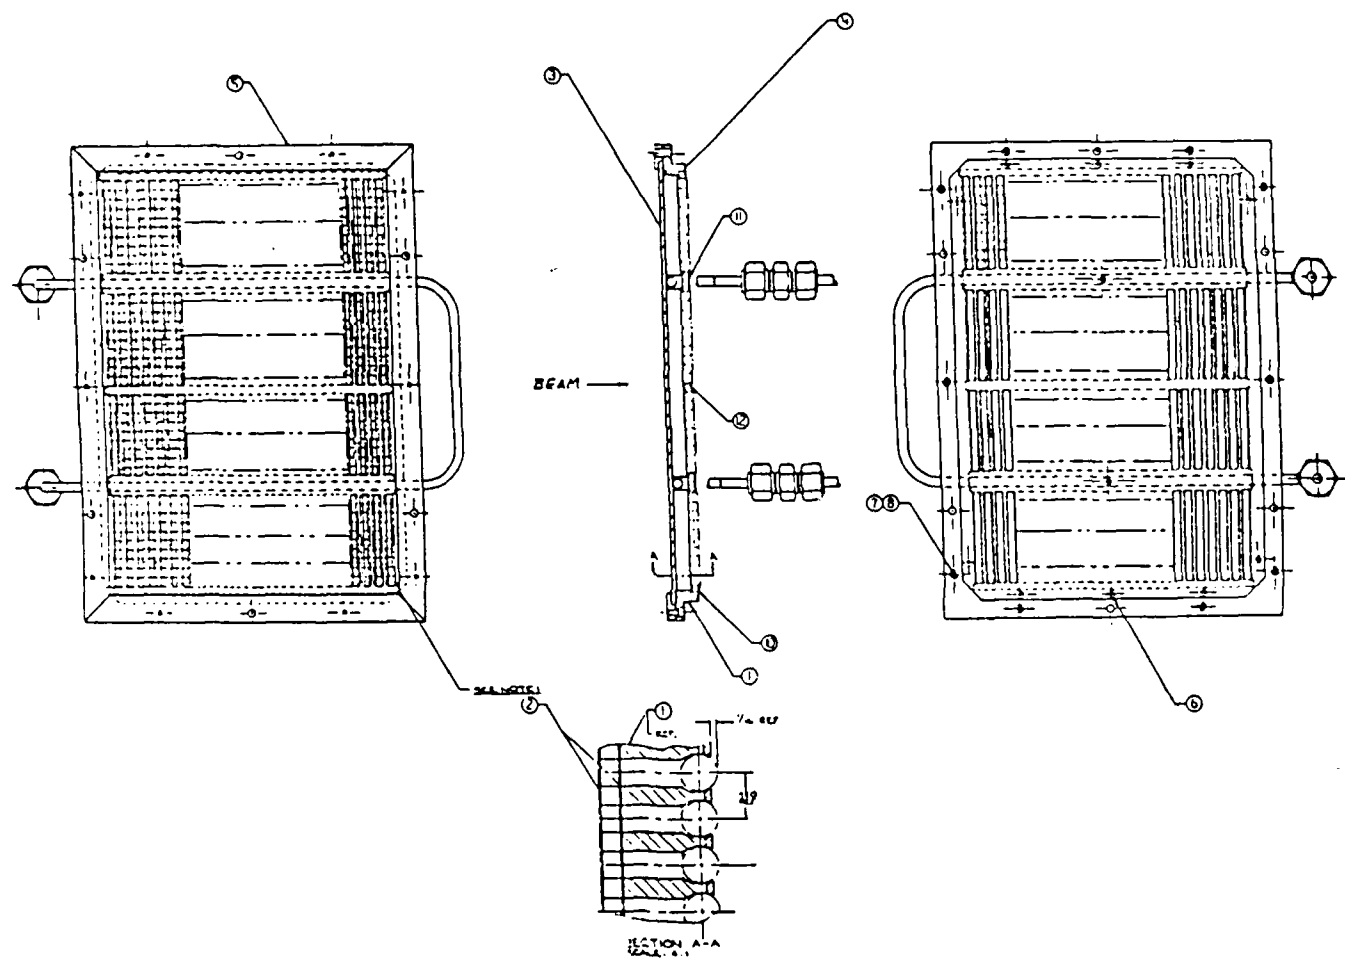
BALL/ROLLER WORKPIECE FIXTURE.
